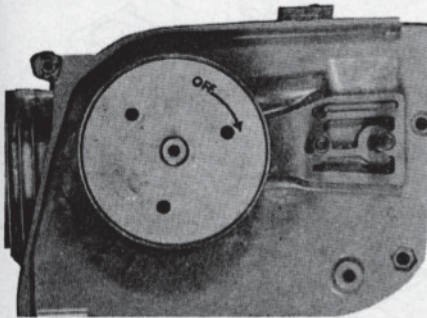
Clutch hub is removed by unscrewing clockwise as indicated on hub. Refer to Fig. HL254.
